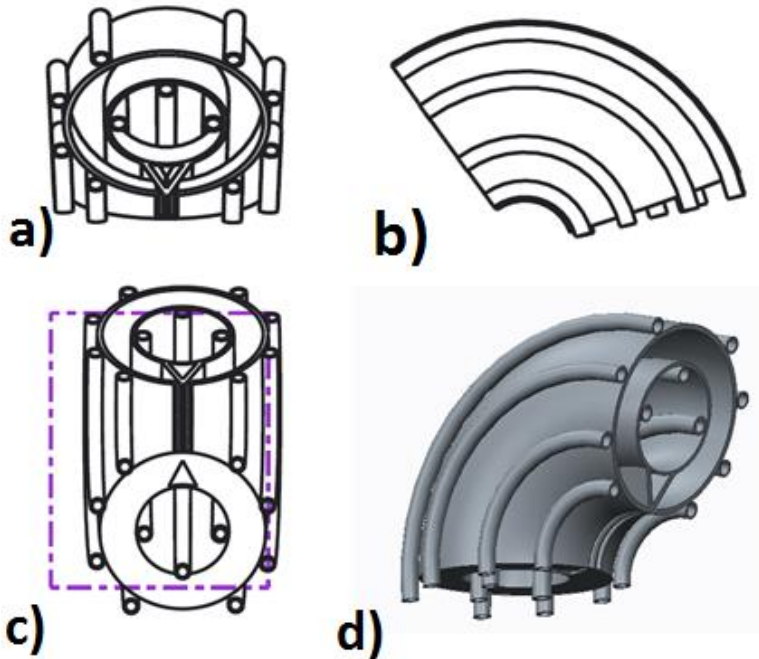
Suggested design for the coil. a) front view b) side view c) bottom view d) 3D model
